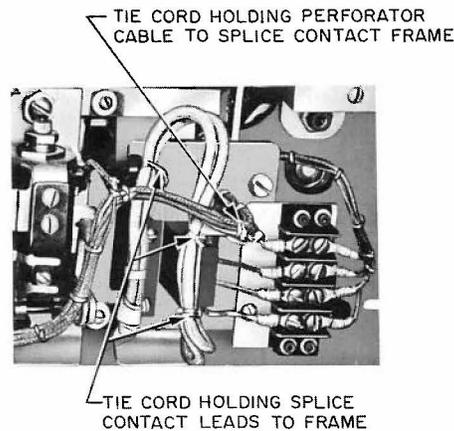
Splice Contact Assembly — D-176283 perforator
